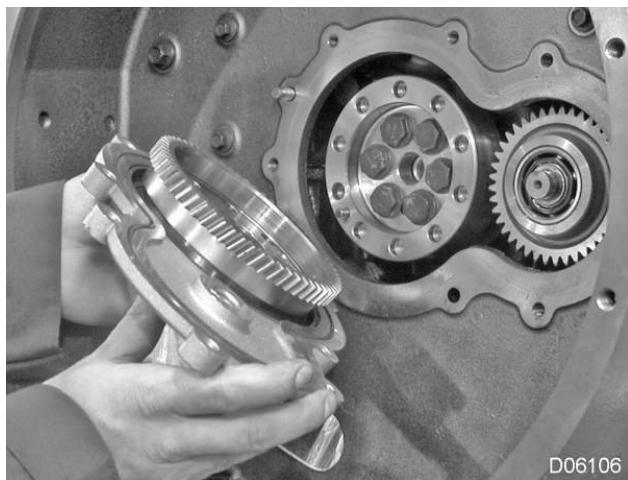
Remove Secondary Flange Gear and Rear Oil Seal Retainer
